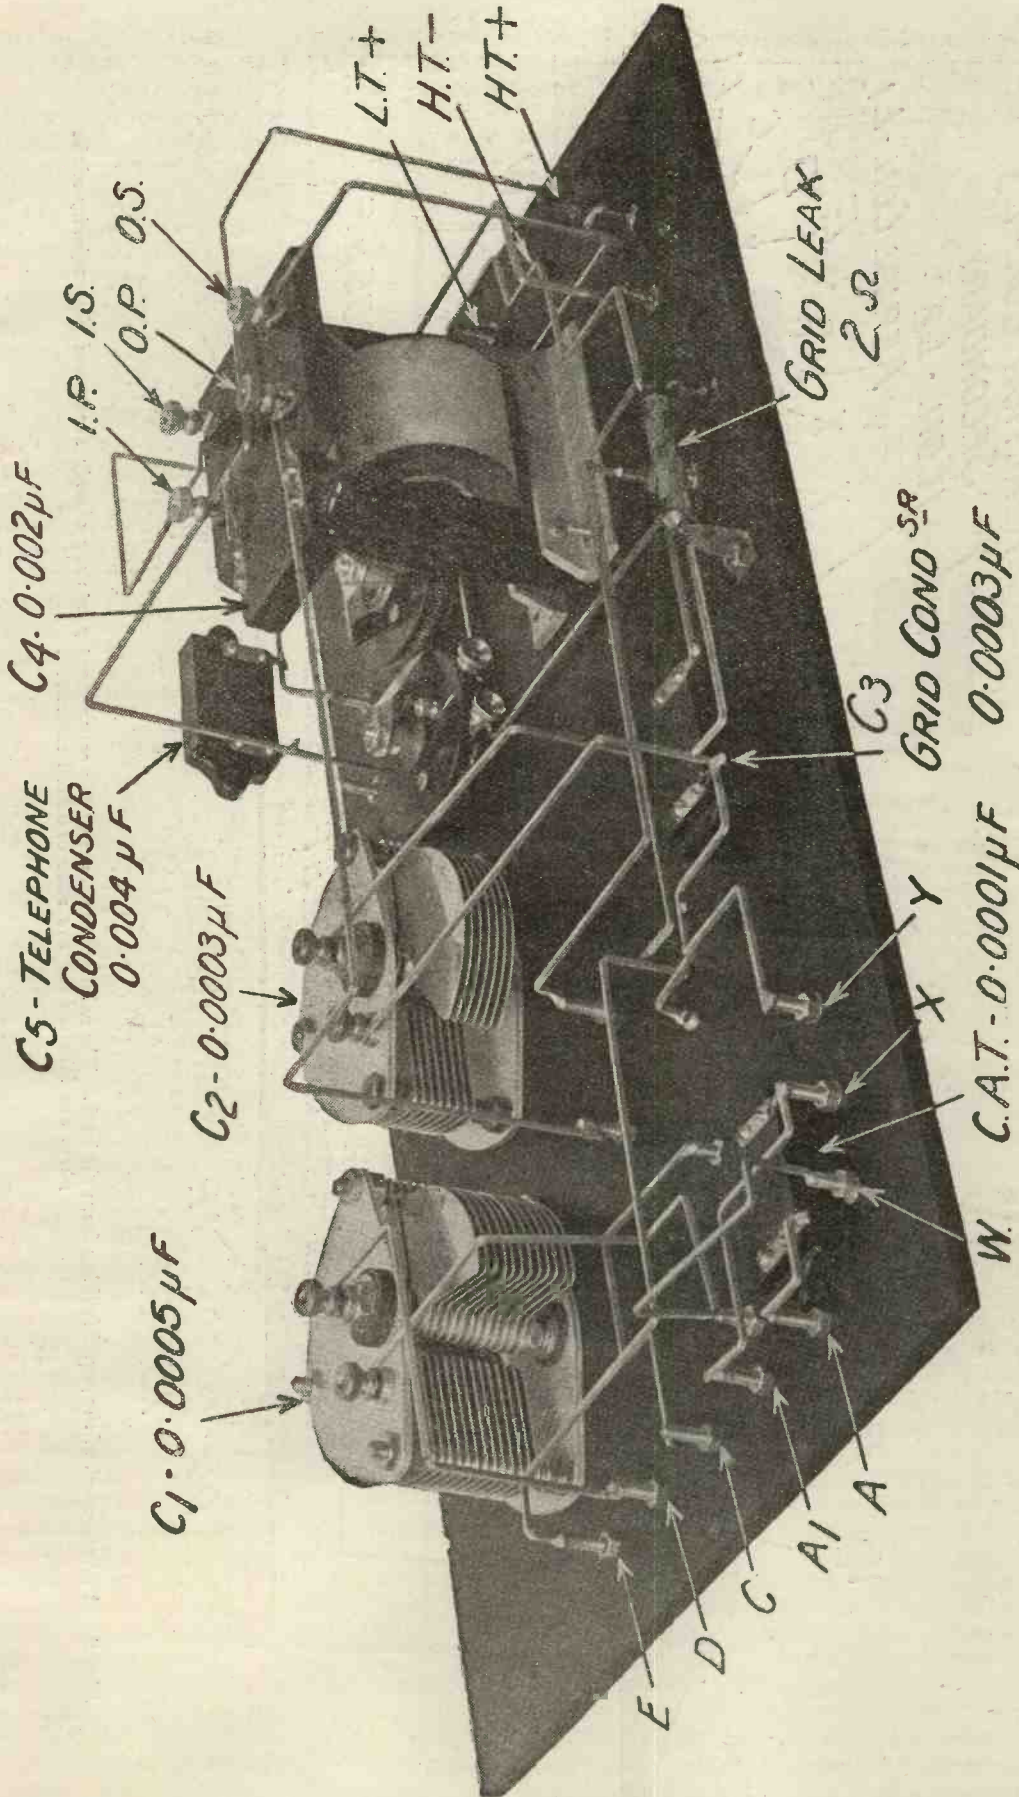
The underside of the panel, showing the layout of the components and wiring.
